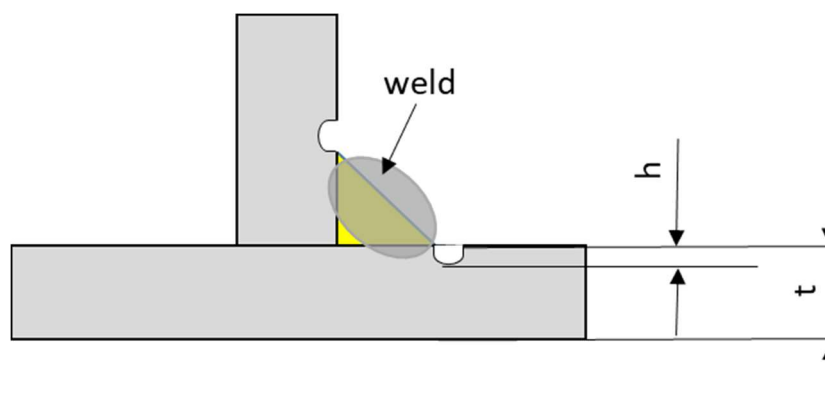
Acceptable undercut for a fillet weld
